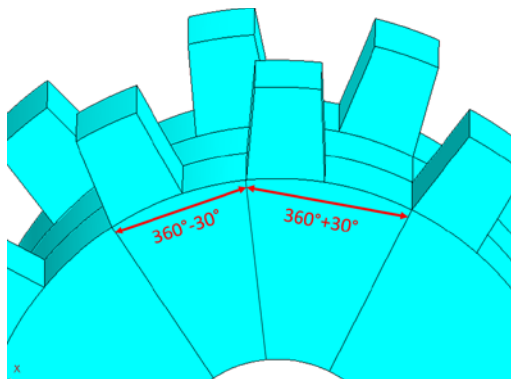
(a) Rotor tooth pitching shown in electrical degrees.
